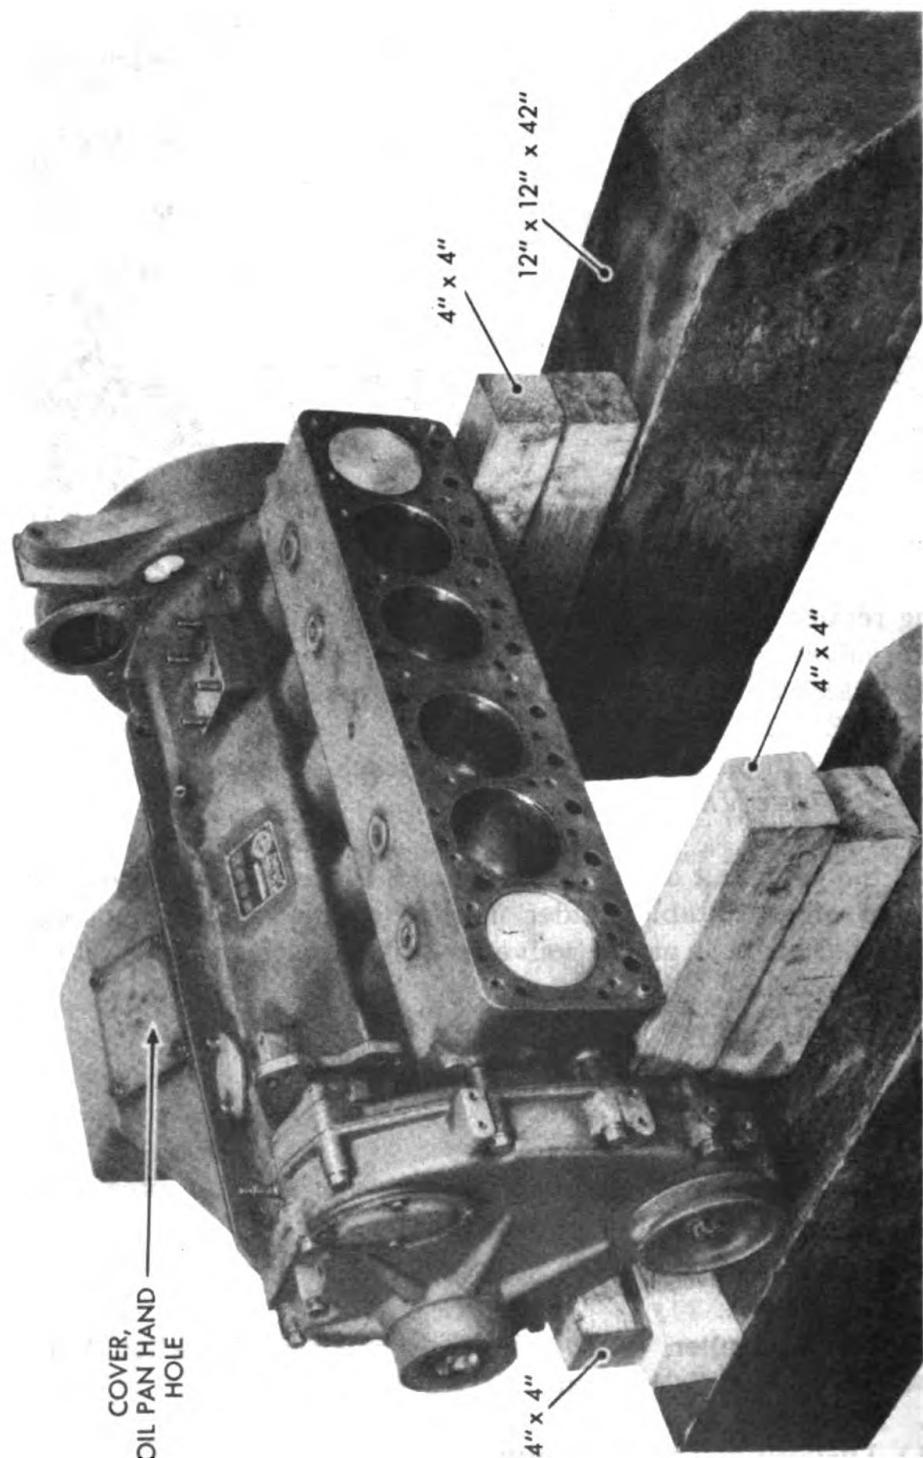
Position of Engine for Removal of Oil Pan and Pistons and Connecting Rods
